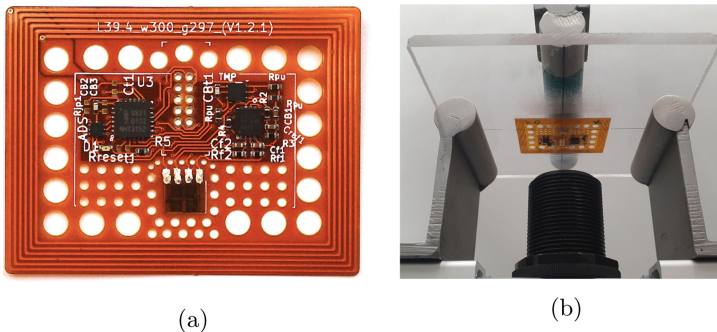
a) Flexible PCB sensor tag prototype, fully assembled. b) Test specimen in bending machine
